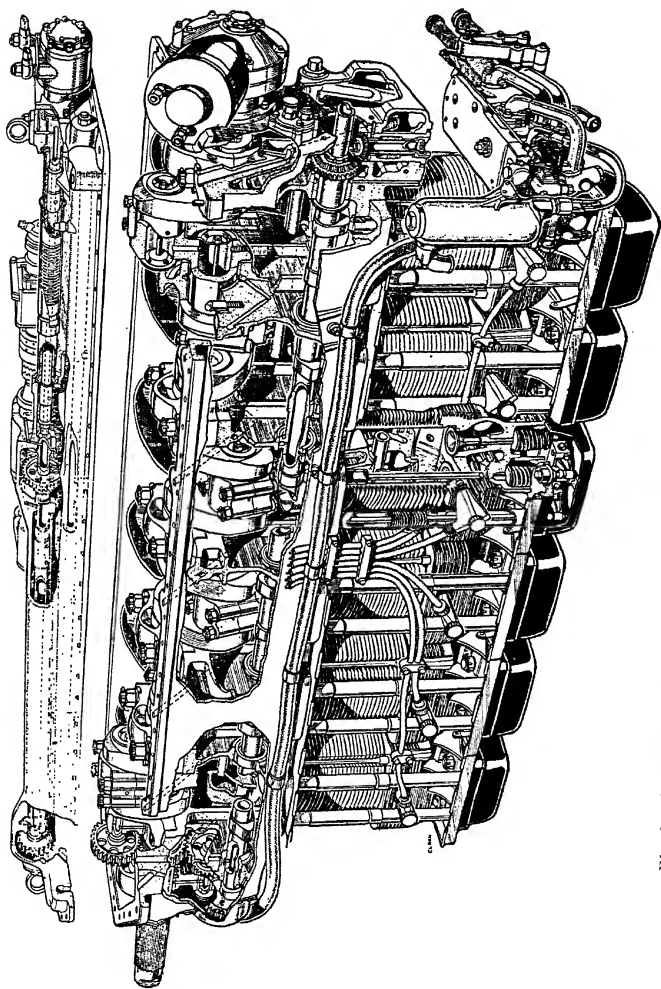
CUT-AWAY VIEW OF "GIPSY SIX" SERIES II ENGINE. (By courtesy of "Flight.")
